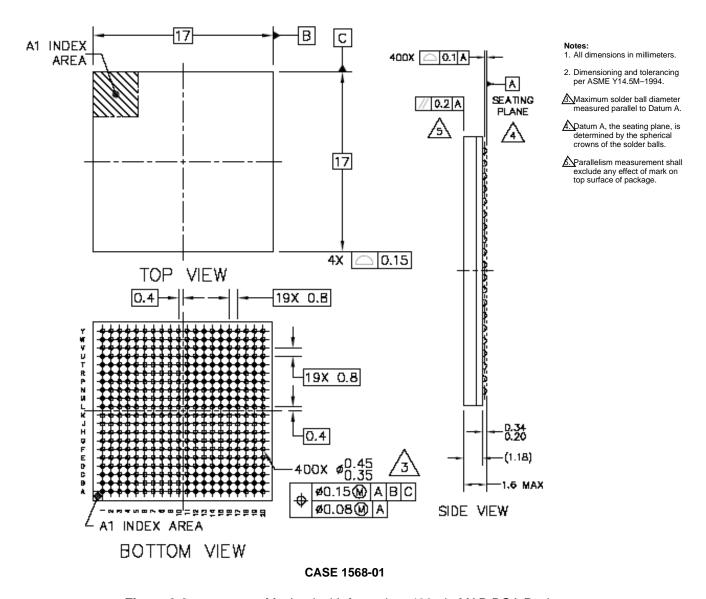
MSC7115 Mechanical Information, 400-pin MAP-BGA Package
